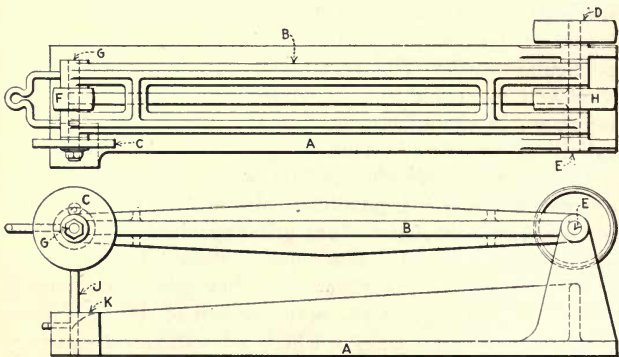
Laboratory grinding-wheel testing machine for testing grinding wheels used in hand-grinding operations.
